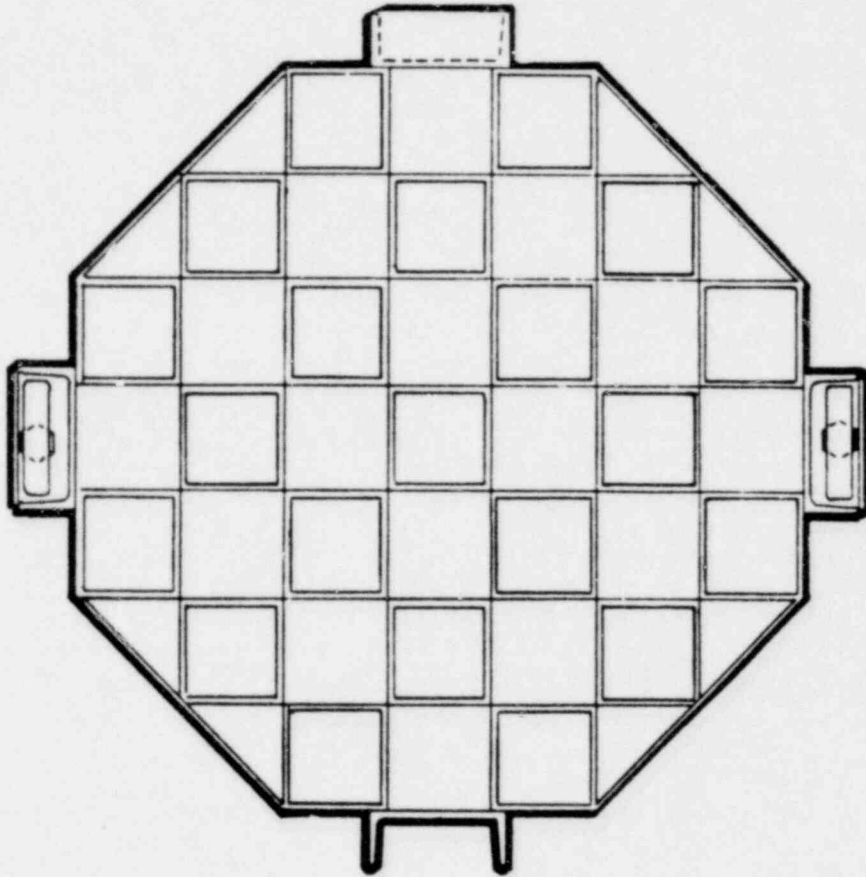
SKETCH OF CROSS SECTION OF BASKET
